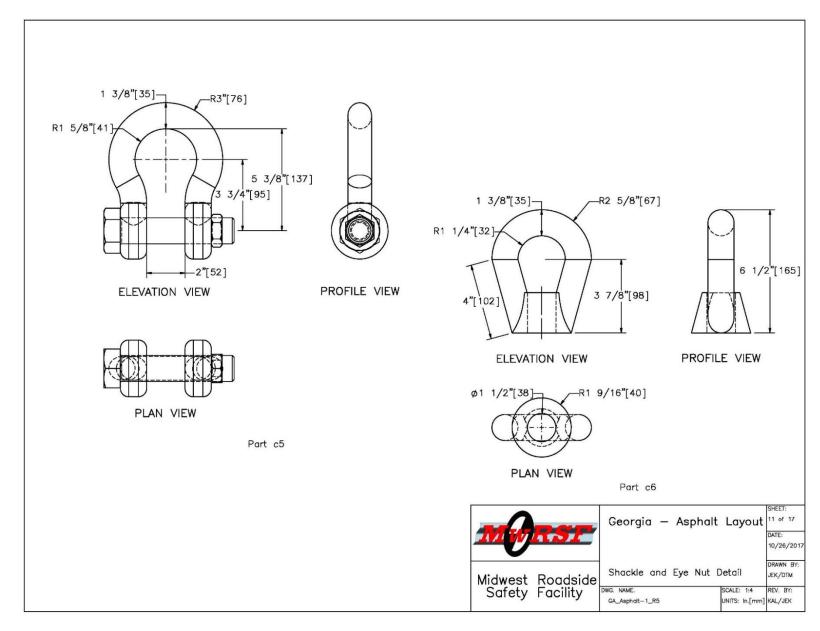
Shackle and Eye Nut Detail, Test No. GAA-1
